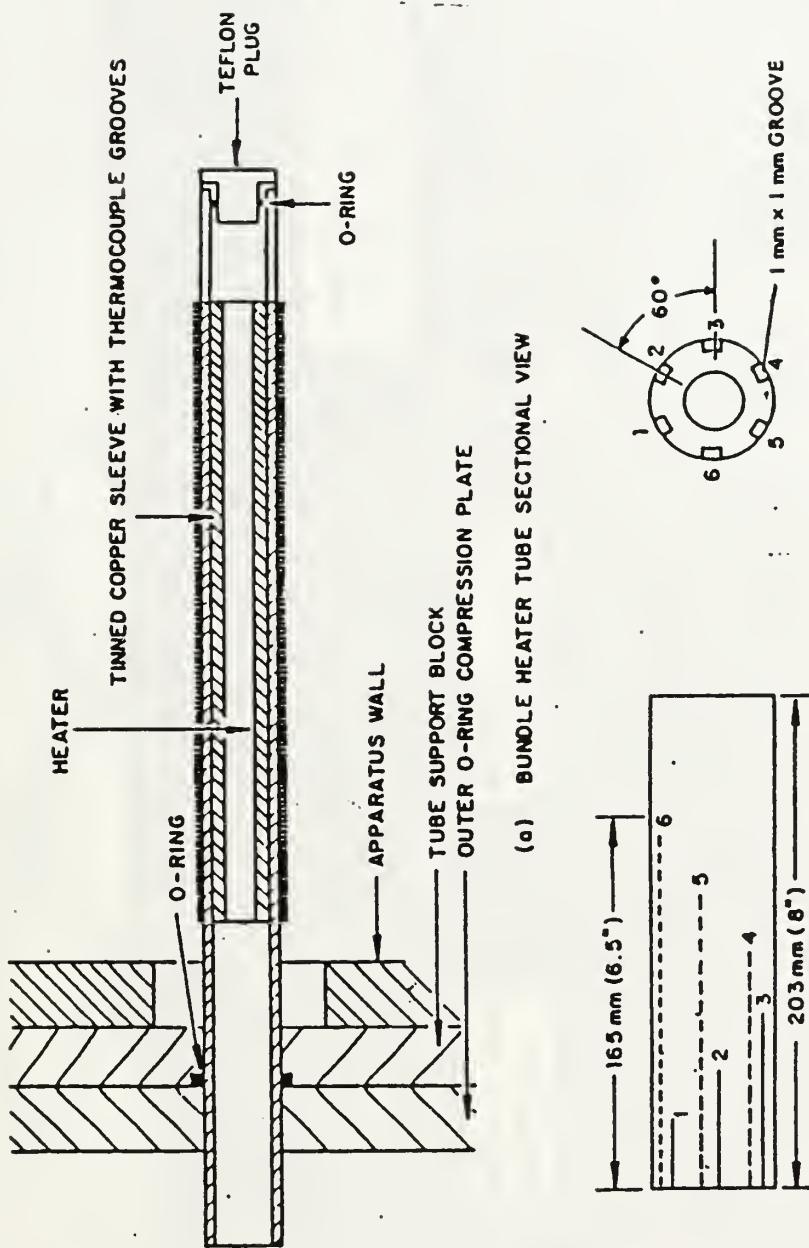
Thermocouple Locations on an Instrumented Boiling Tube and Tube Section View
